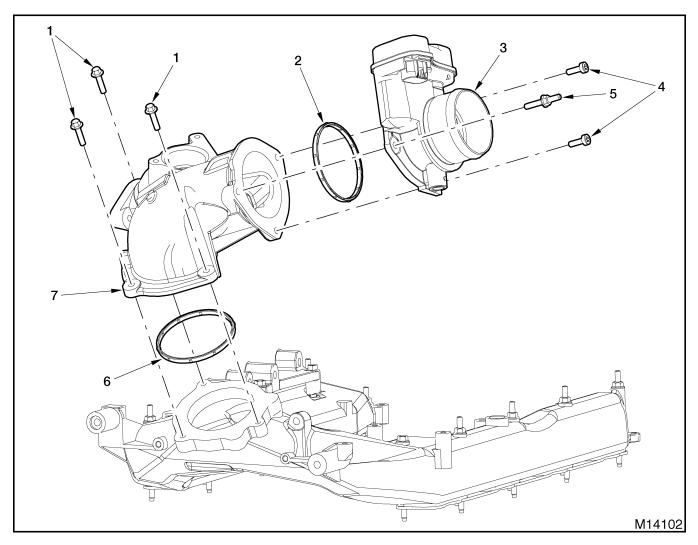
Intake Throttle Valve (ITV) and EGR valve elbow housing
